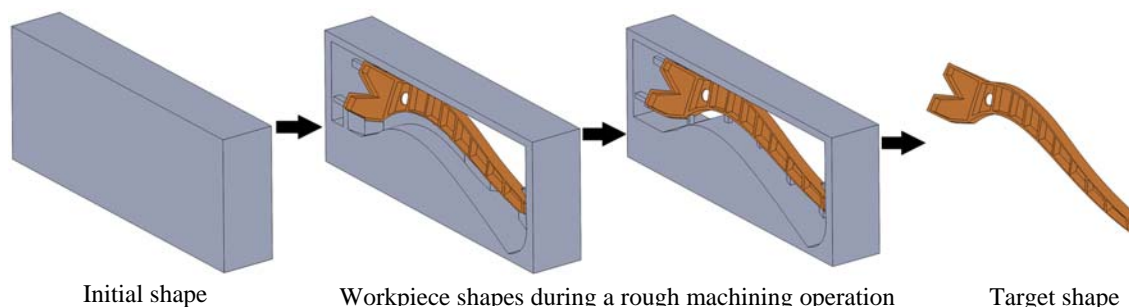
Rough machining operation is divided into several steps corresponding to certain unmachined volume. The optimized workpiece shape is calculated depending on applied loads at each machining step.
